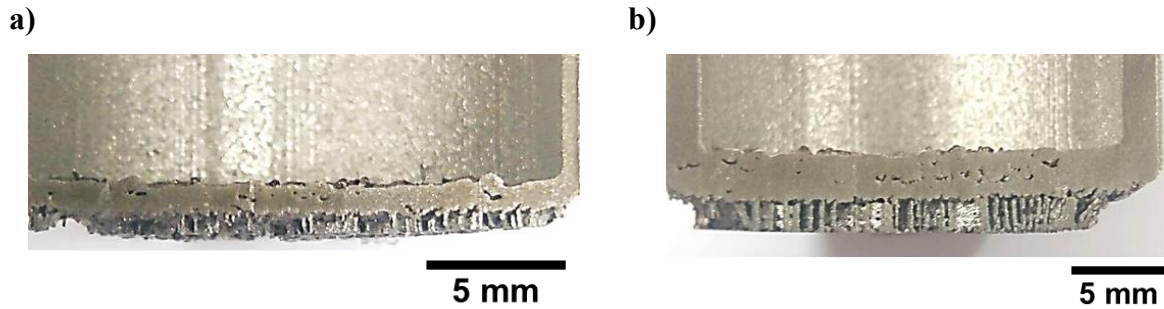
Photographs of the base cross-section of two LPBF in-situ shelling canisters. a) canister with 0.75 mm wall thickness & b) canister with 2 mm wall thickness.
